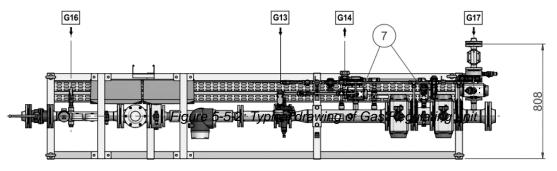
Typical drawing of open type gas regulating valve unit
